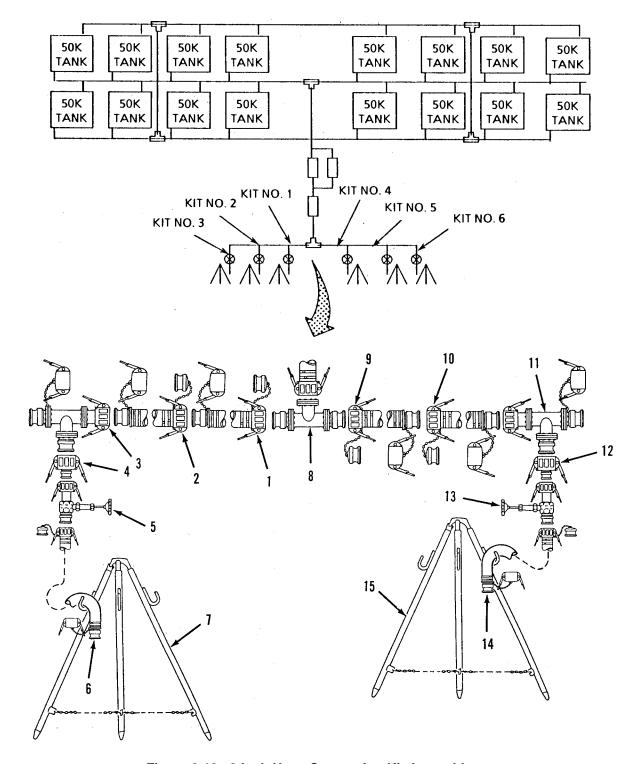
2-Inch Hose Connection Kit Assembly.
